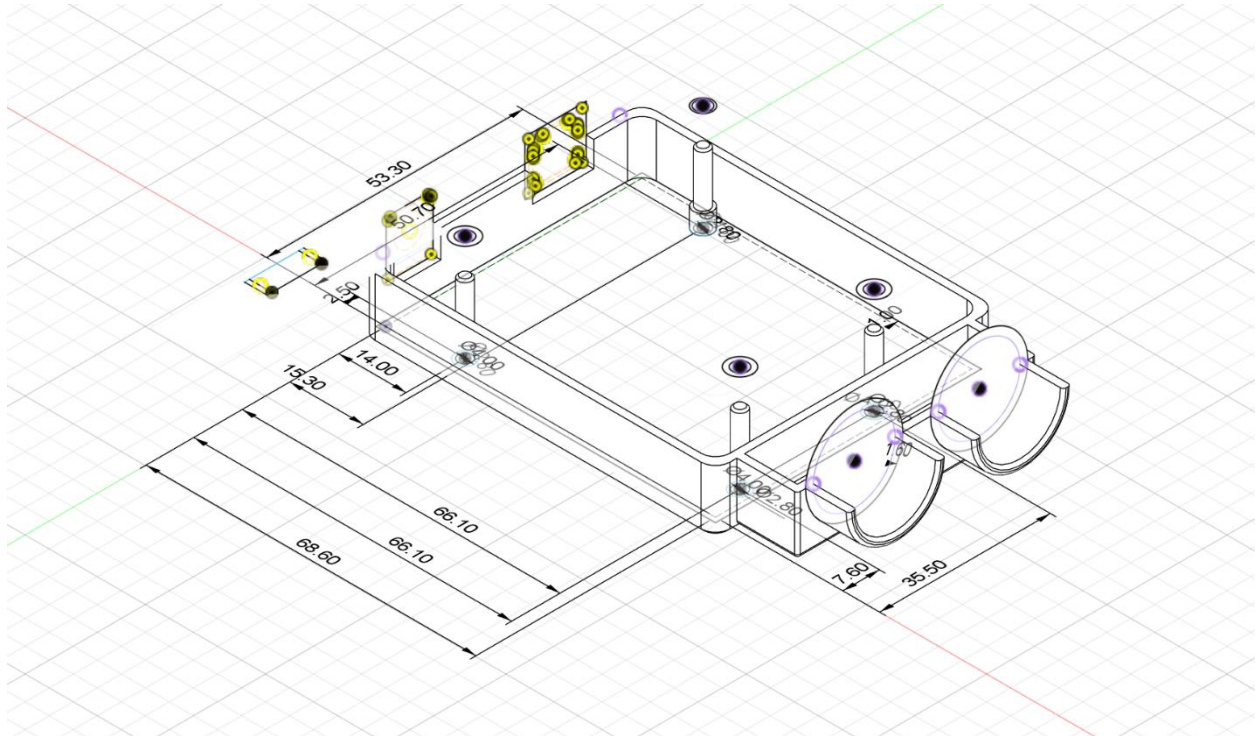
Dimensioned CAD model of the bottom part of the enclosure
